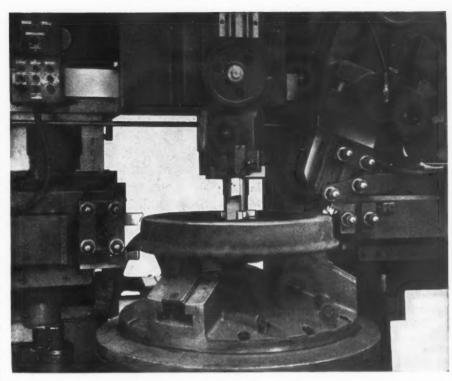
Close-up View of Rough Car Wheel Held by Three-jaw Chuck
